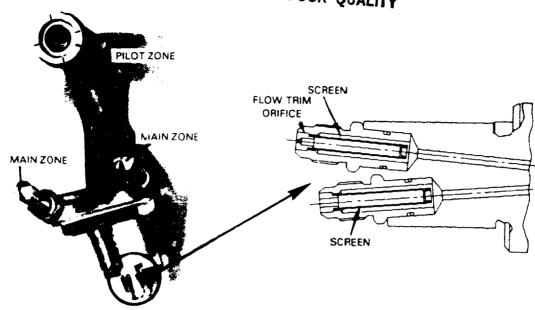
Fuel Inlet Section of Fuel Injector Support Assembly
